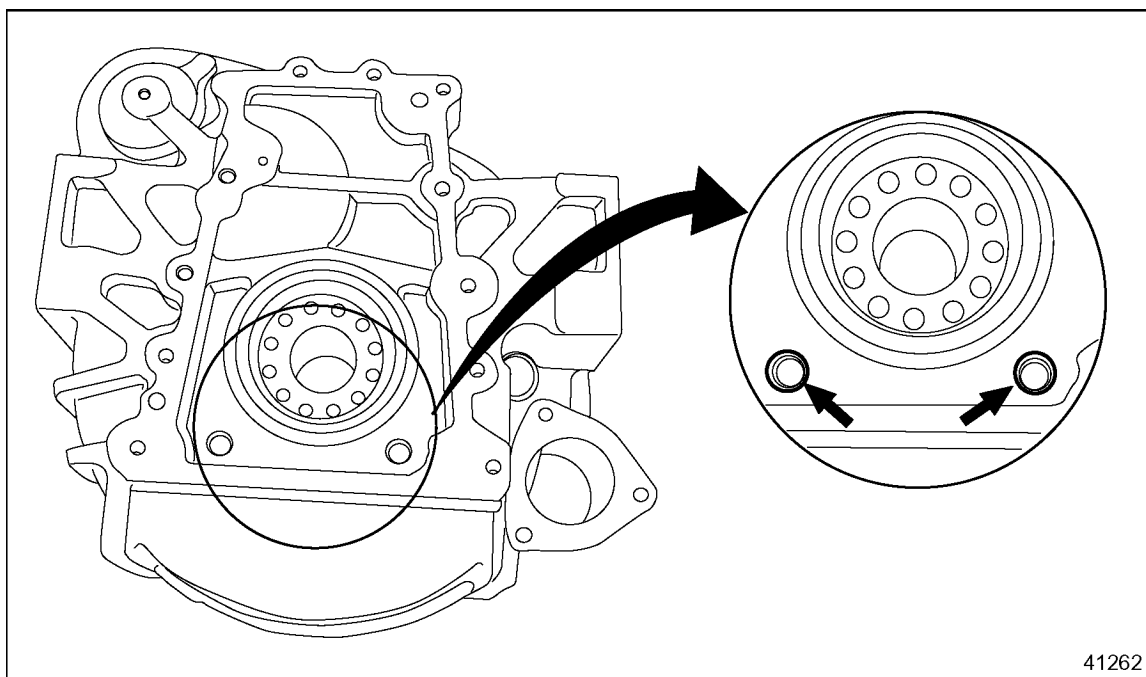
No Pipe Plug in these Two Threaded Holes
